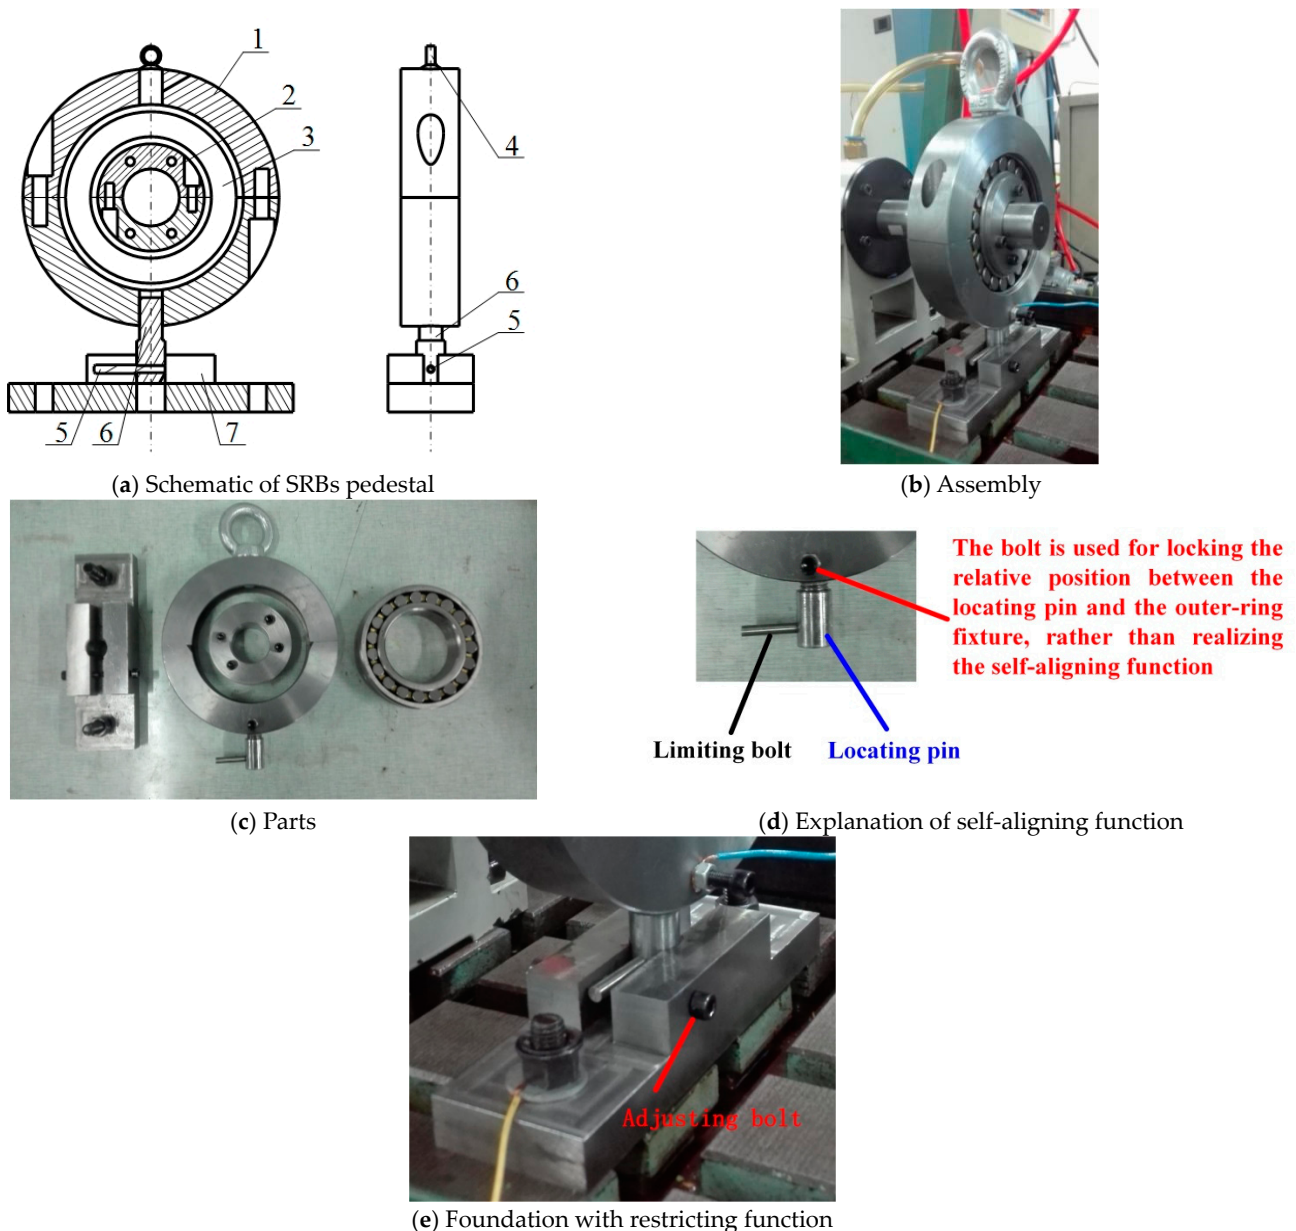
SRBs pedestal with self-aligning function. 1 outer-ring fixture; 2 inner-ring fixture; 3 SRB under test; 4 loading ring; 5 limiting bolt; 6 locating pin; 7 foundation; 8 adjusting bolt.
